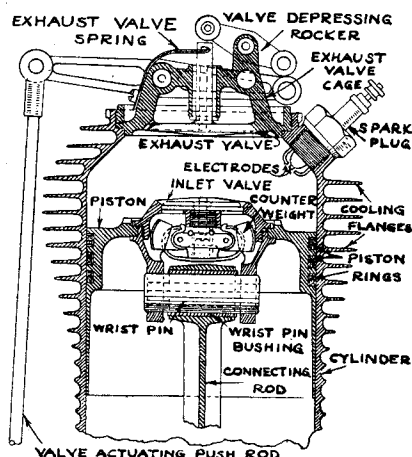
Section of 50 h.p. Gnome engine cylinder, showing automatic inlet valve in piston
